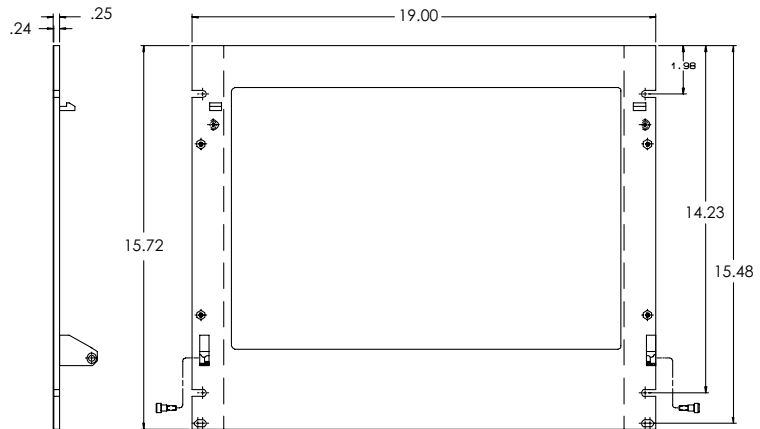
VXI PLUG AND PLAY MOUNTING PLATE FOR 9U CHASSIS. PART # 310 113 257 AND 310 113 272
